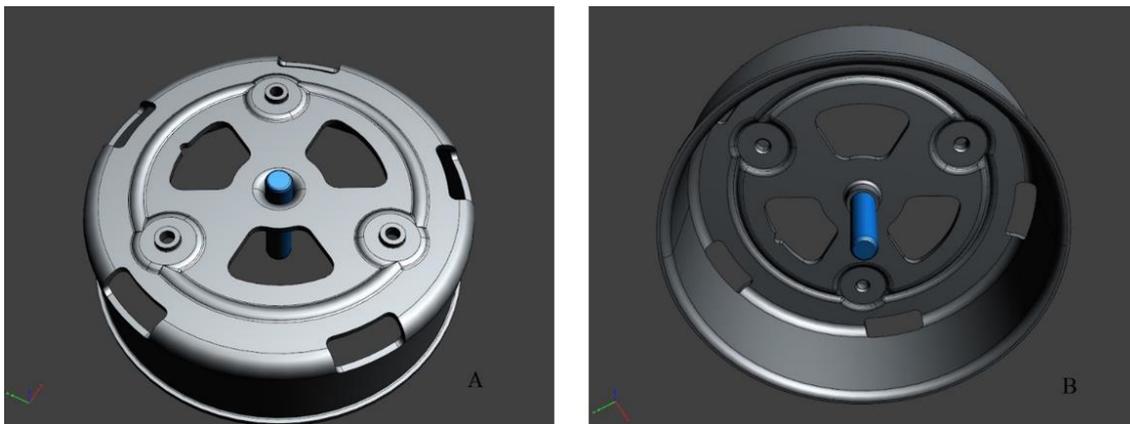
Rotor and shaft assembly: (A) top view, (B) bottom view [7]
